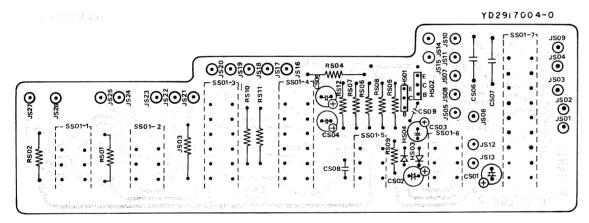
Dolby FM, Mono L, R, Multipath and Monitor Switches Assembly PS01 Component Locations
